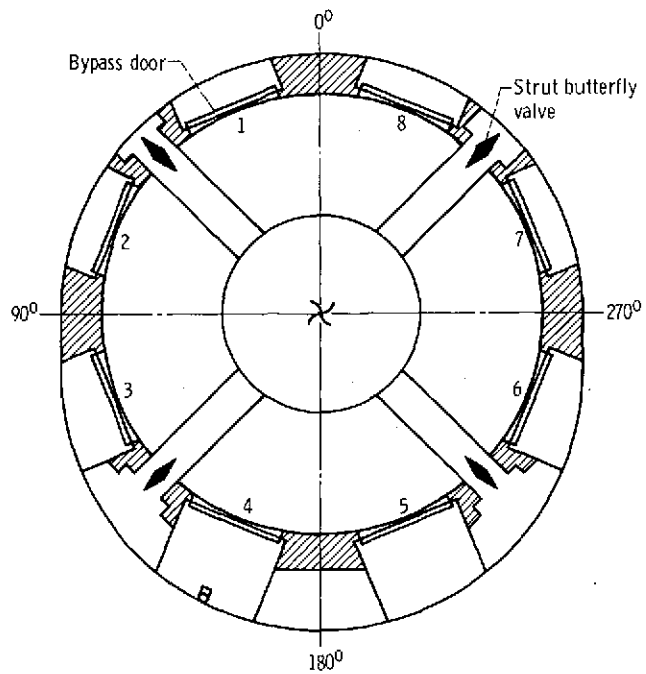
Cross section of inlet diffuser looking downstream, showing bypass doors and centerbody bleed flow struts.
